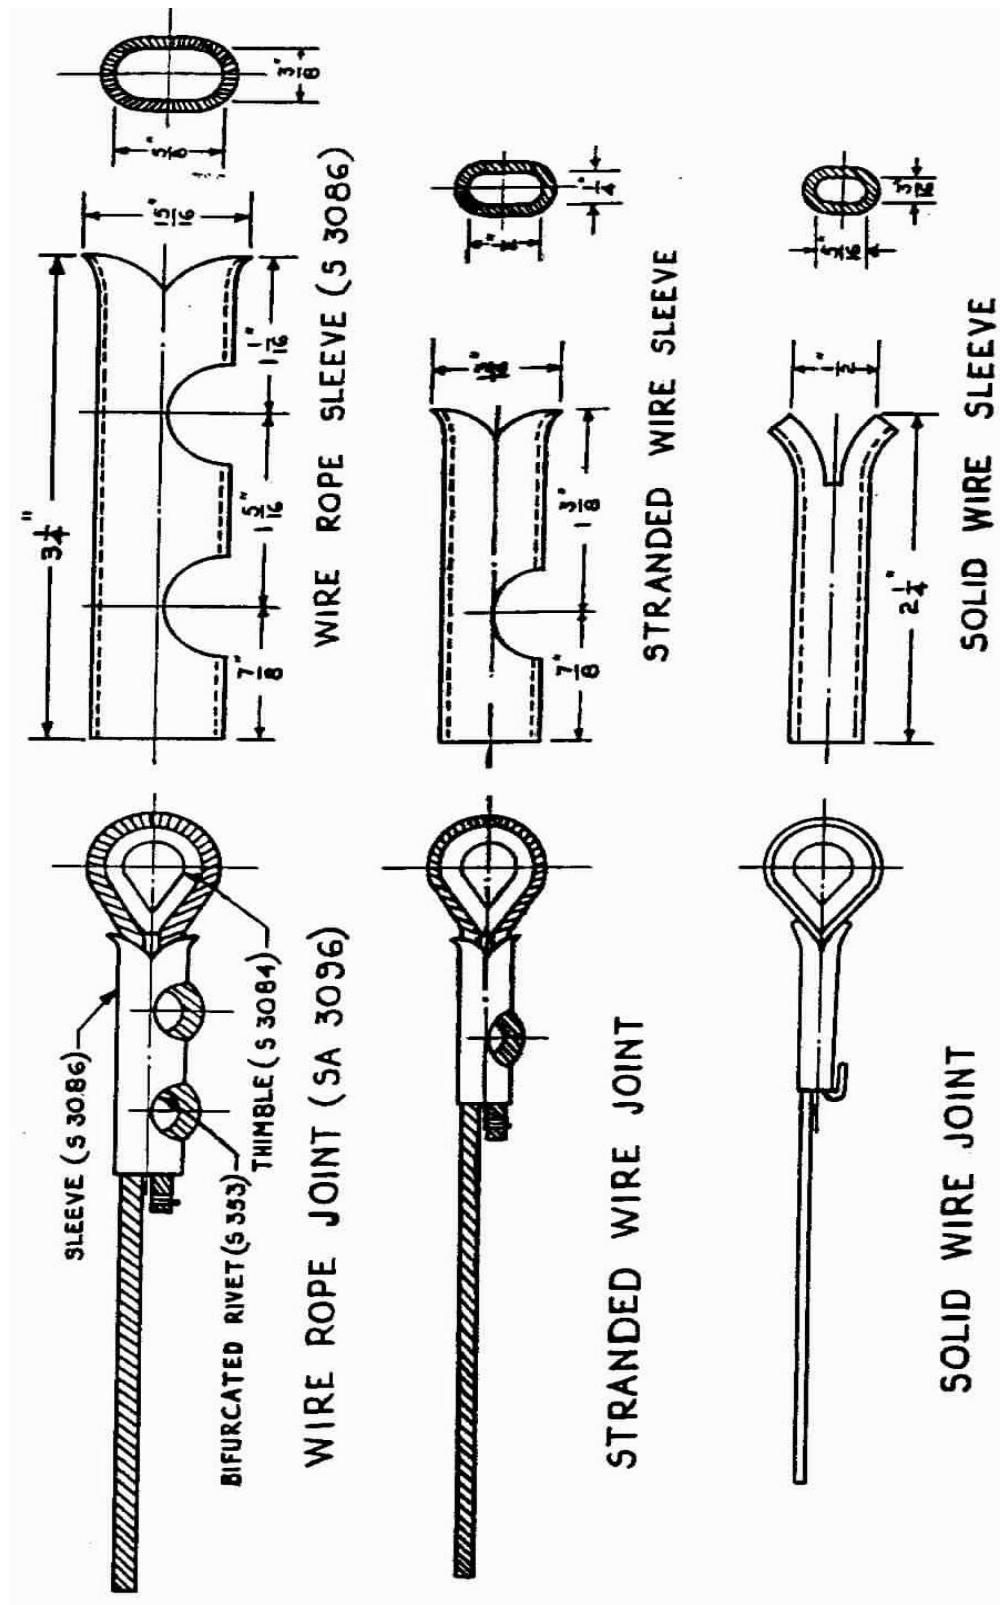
ROPE &amp; WIRE JOINTS
